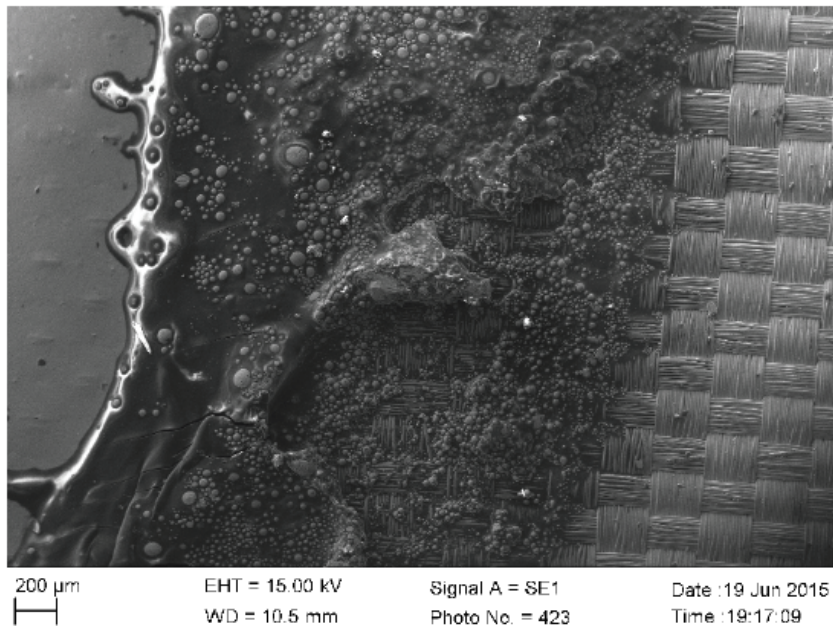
Excessive indium solder flux residue with micro particles of solder visible in suspension.
